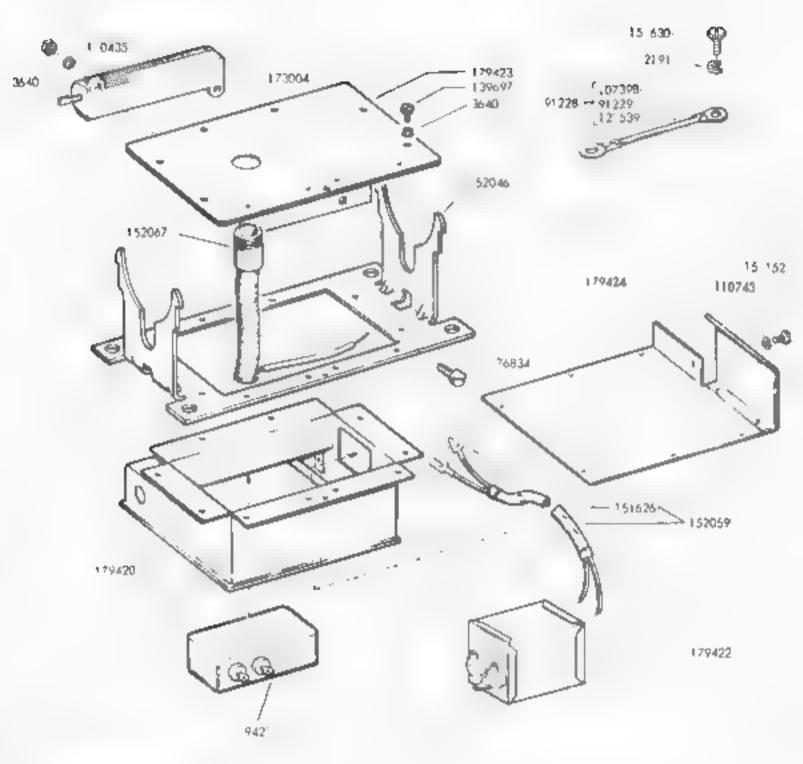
SERIES MOTOR UNIT MOUNTING PARTS (LMU14, 110V, AC)
